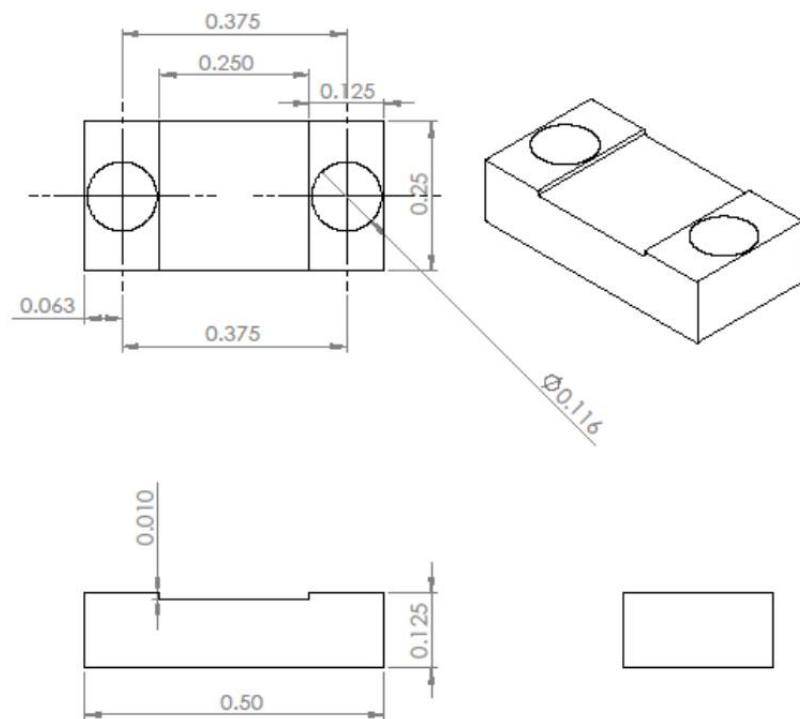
Schematic for middle pieces of C-C Fixture. Dimensions in inches.
